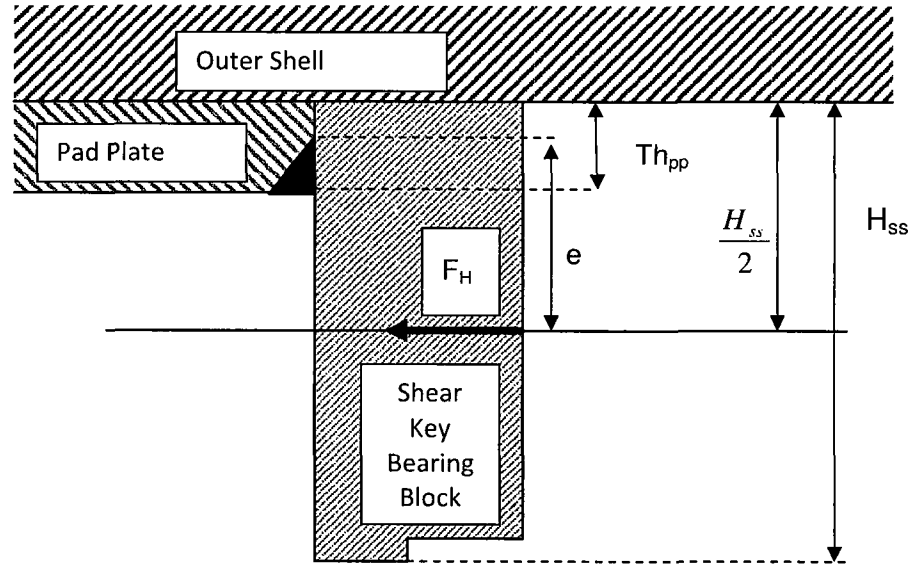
Shear Key Bearing Block and Pad Plate Weld Bending Length
